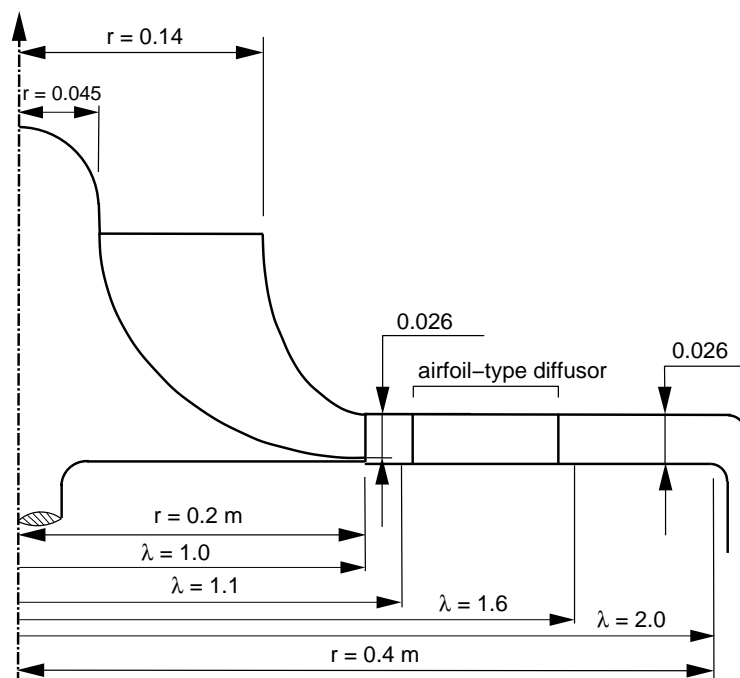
Meridional projection view of the impeller with the airfoil-type diffuser.
